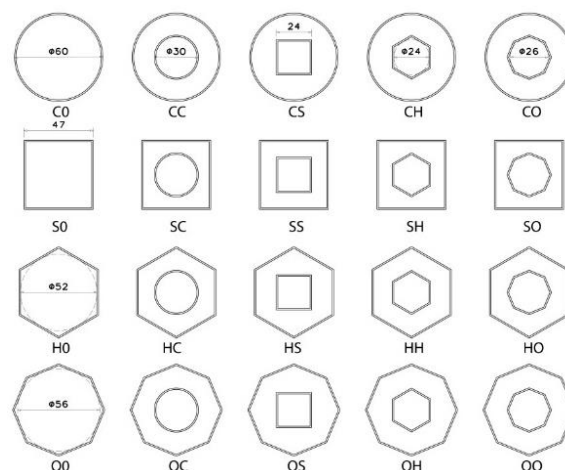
The cross-sectional area of geometry and dimensions of samples (in mm)
